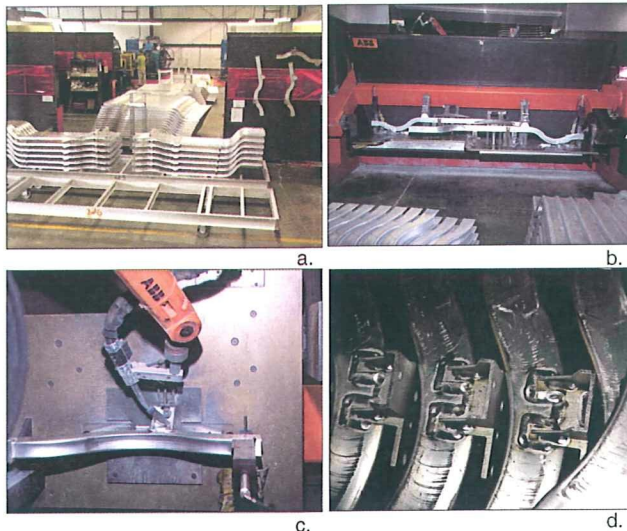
Robotic MIG welding of the AlumiCore side rails at Douglas: a) staging of the bent side rails before bending, b) fixing the attachments to the side rails for robotic MIG welding, c) close up view of robotic MIG welding head before welding, d) finished MIG welded brackets on side rails.
